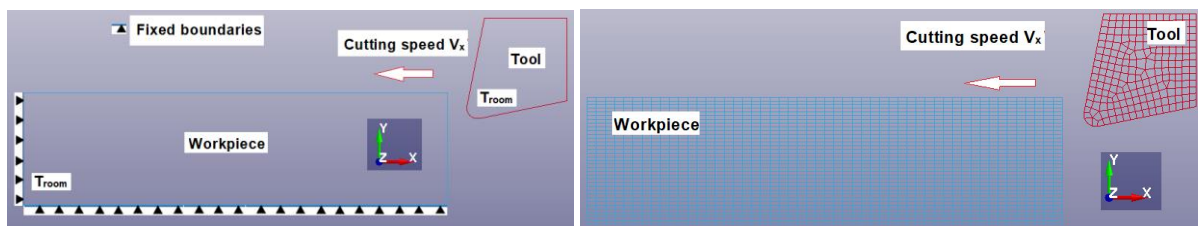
(a) CAD model of cutting insert and workpiece and (b) thermo-mechanical initial conditions of the cutting insert and workpiece for orthogonal cutting process.
